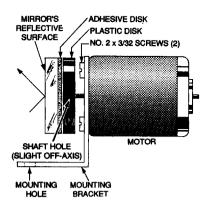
AN ALUMINUM BRACKET is attached to each motor with two No. 2 \times %₂ self-tapping screws. The mirror-mounting disk should be pressed onto the motor shaft as far as possible without contacting the screws.
